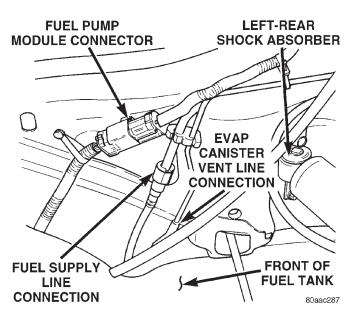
Fuel Tank Connections at Front of Fuel Tank
